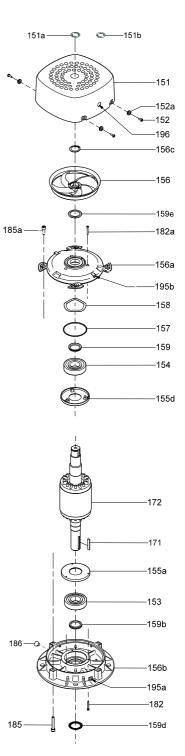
Detail from fig. 24, exploded view of the MGE-F
